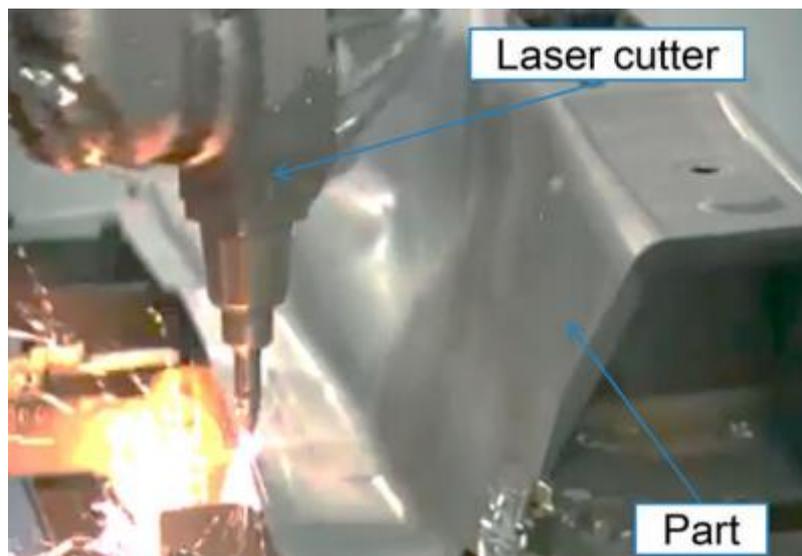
Laser-cutting operation: addition of welding points.
